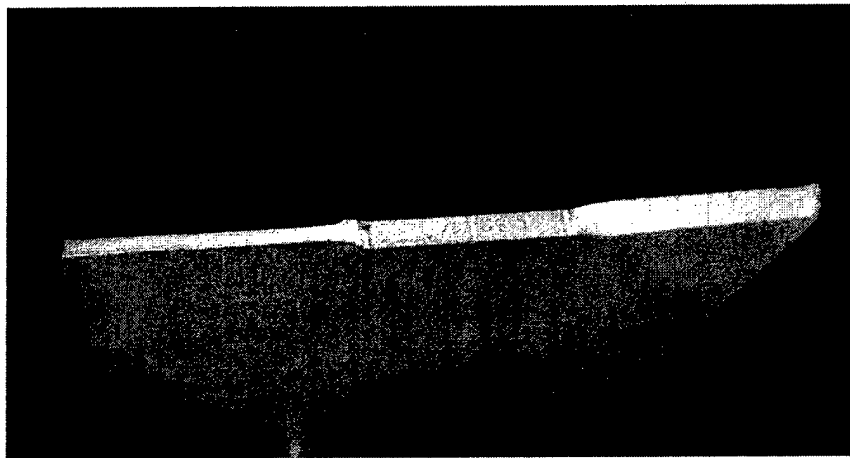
Fractured surface of the center crack specimen tested in Mode I loading
